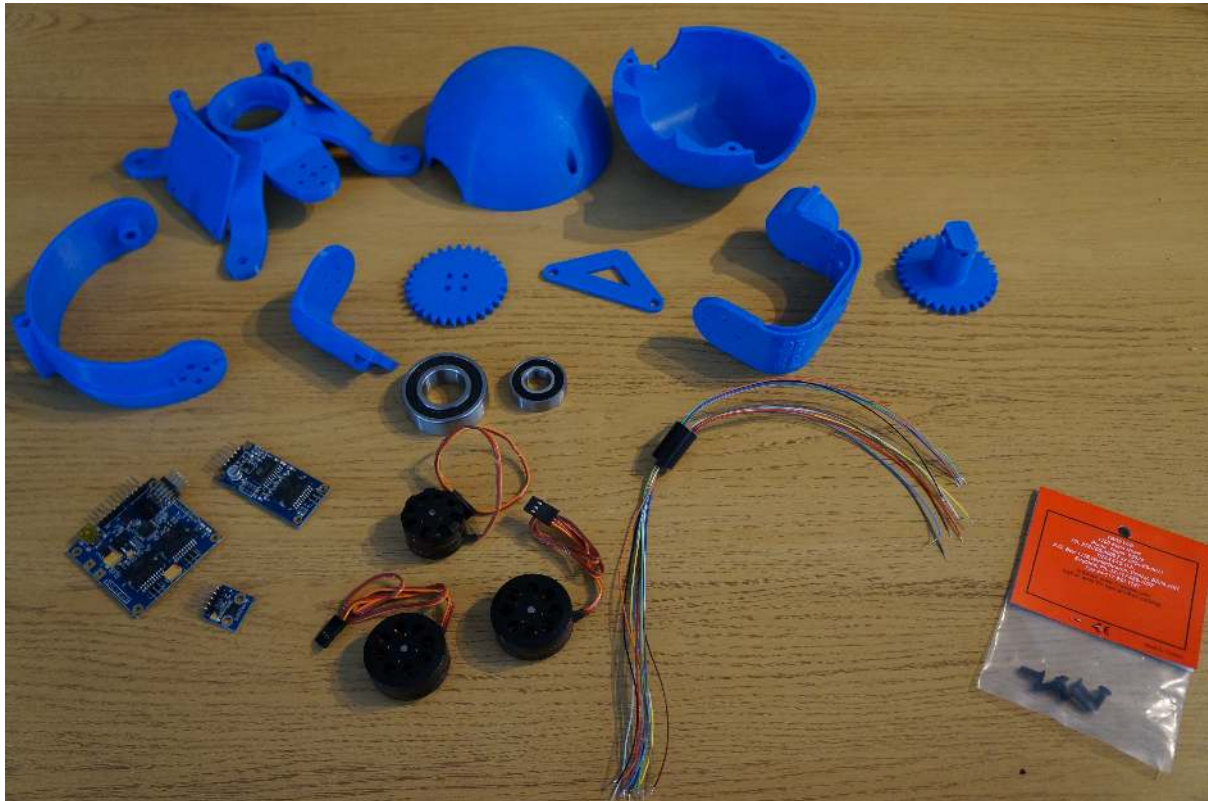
Most of the gimbal's parts laid out, including slip ring, motors and controller. The camera mounting bracket and the threaded brass inserts are missing.
